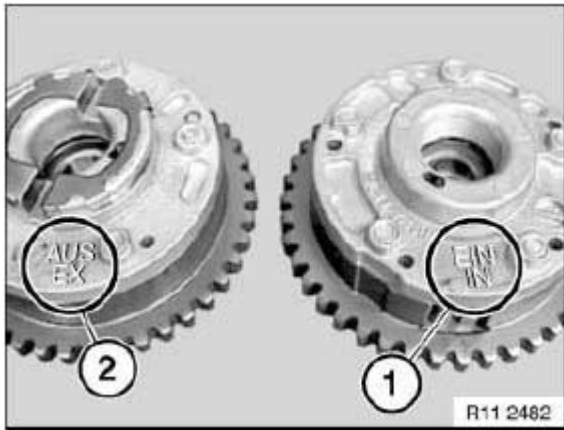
Identifying Inlet And Exhaust Adjustment Unit Mark
